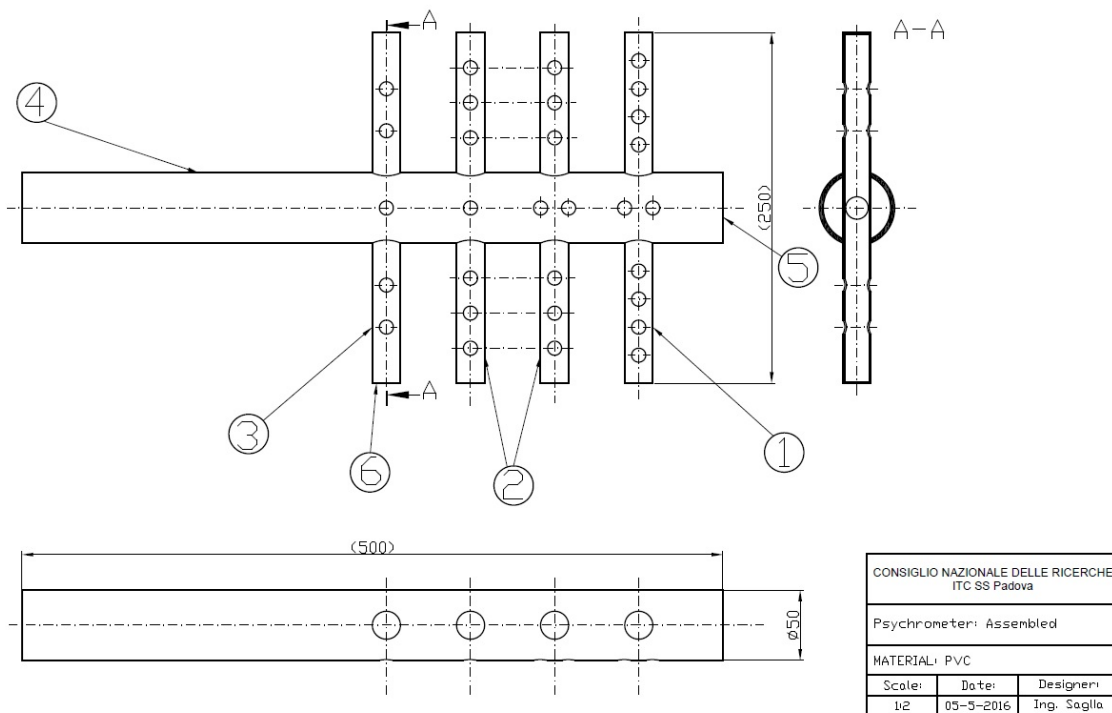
Tubes grid design. 1) 8 holes tube; 2) 6 holes tube; 3) 4 holes tube; 4) Collector; 5) 50 mm stopper; 6) 20 mm stopper
